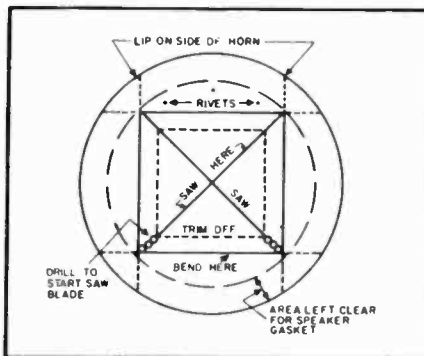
Detail of the speaker mounting ring to be attached to the horn of Fig. 3.
